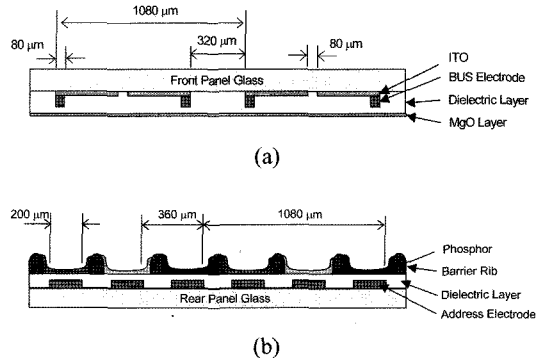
The cross-sectional views of panel sample for vacuum in-line sealing process; (a) front panel and (b) rear panel.
